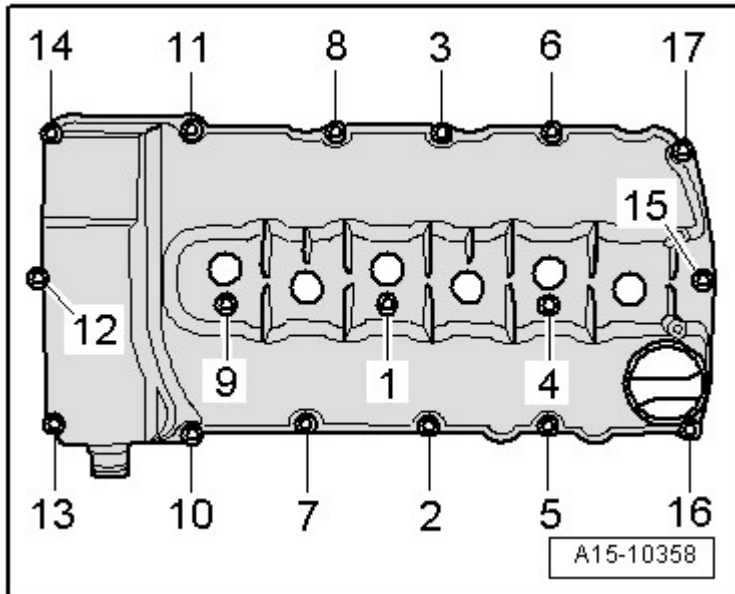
Identifying Cylinder Head Cover Bolt Loosening Sequence
